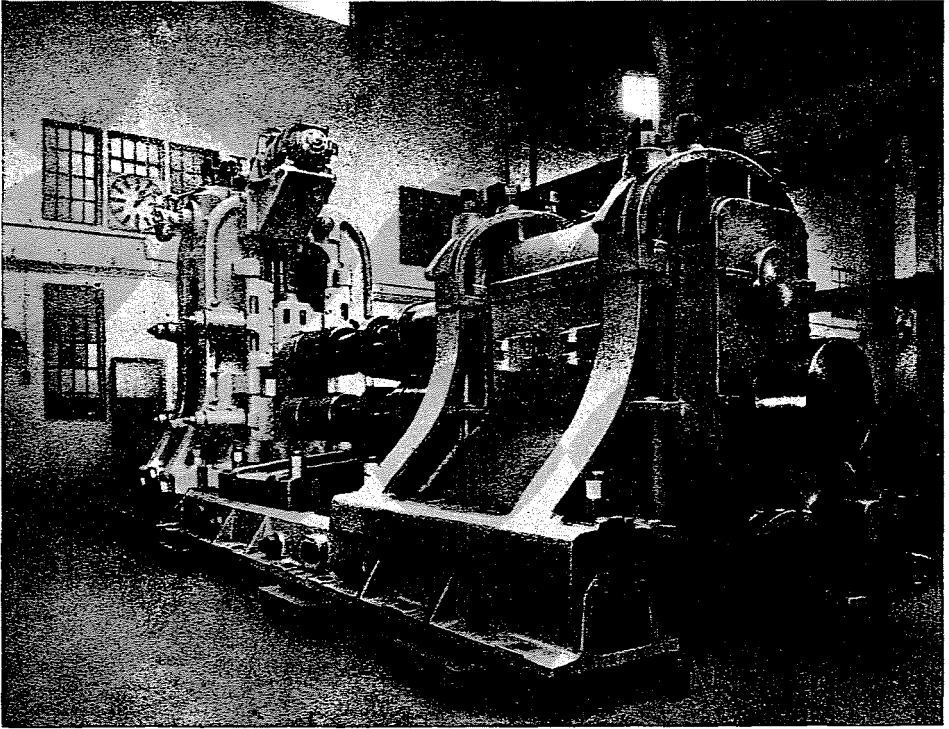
Roll stand, driving shaft and pinion stand for the large Pilger-mill
